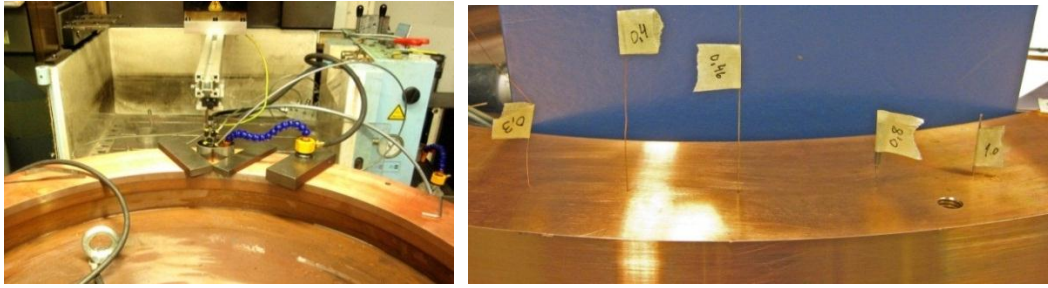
POD weld block (Posiva code XK048) - fabrication of notches / ready small size holes
